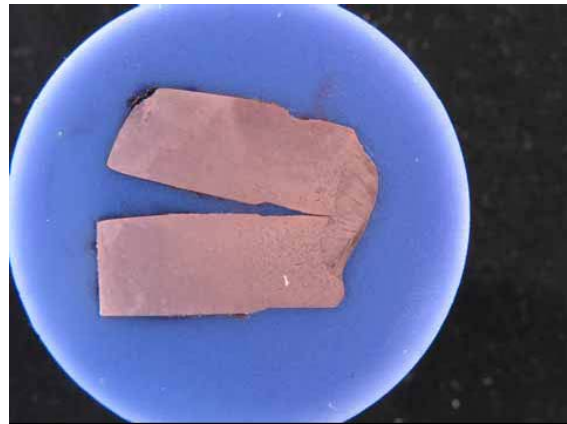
Destruction process of the samples on the test machine to determine the strength of the welded joint.
